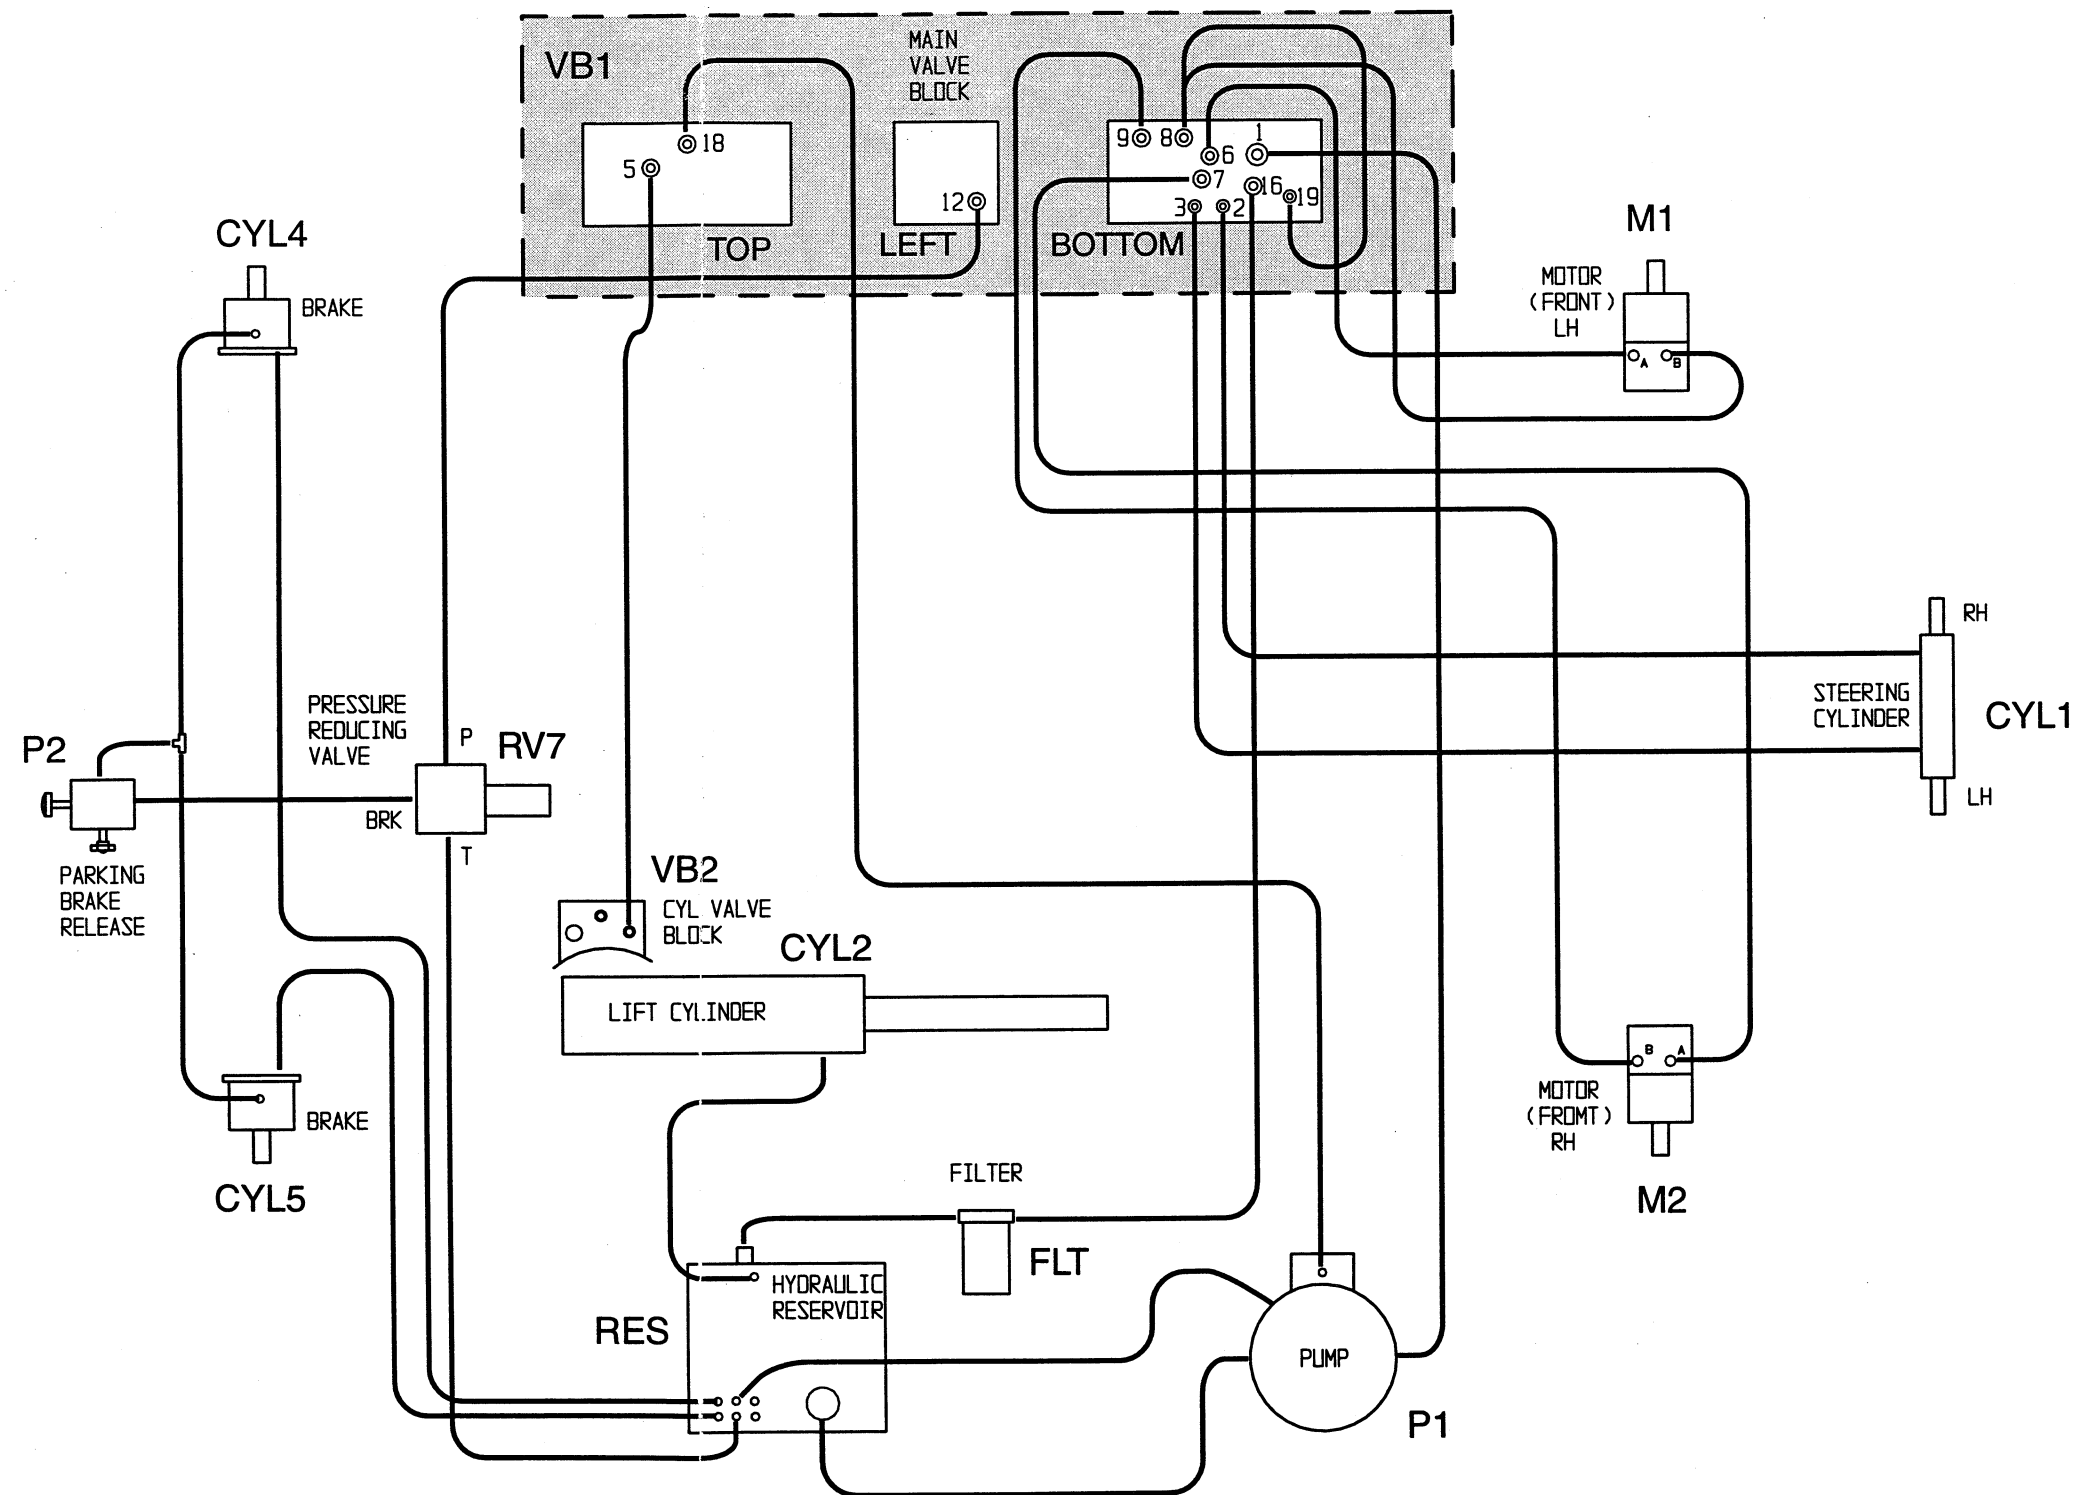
Hose Routing, XRT27 2-Wheel Drive
